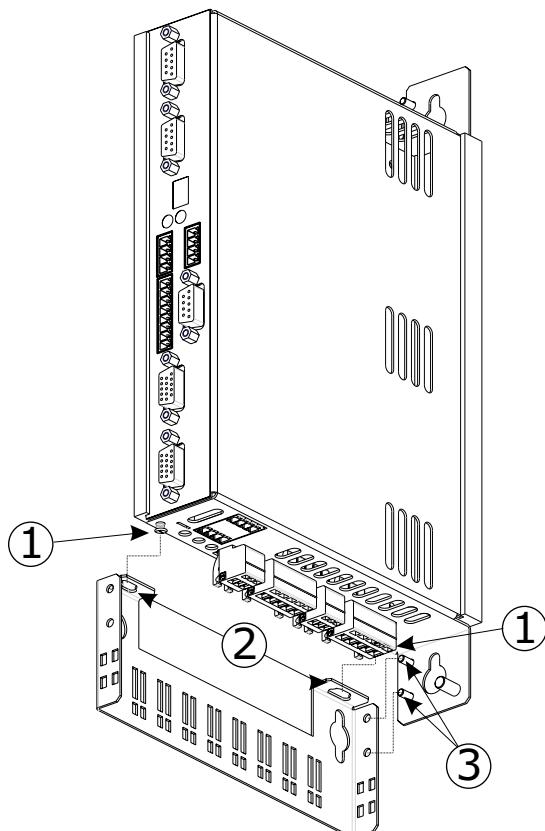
1: Mounting of the shield plate (example: lower shield plate)
